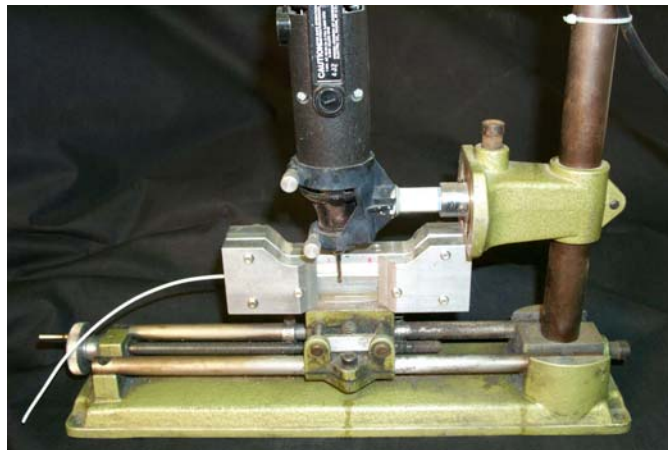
Dremel Tool Mounted in Custom Mill
